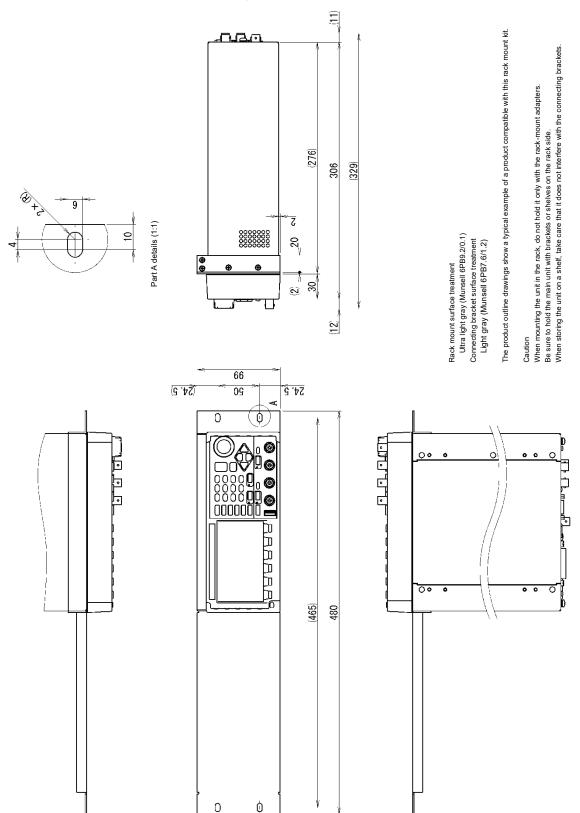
Rack mount dimensional drawing (JIS, for 1 unit)
